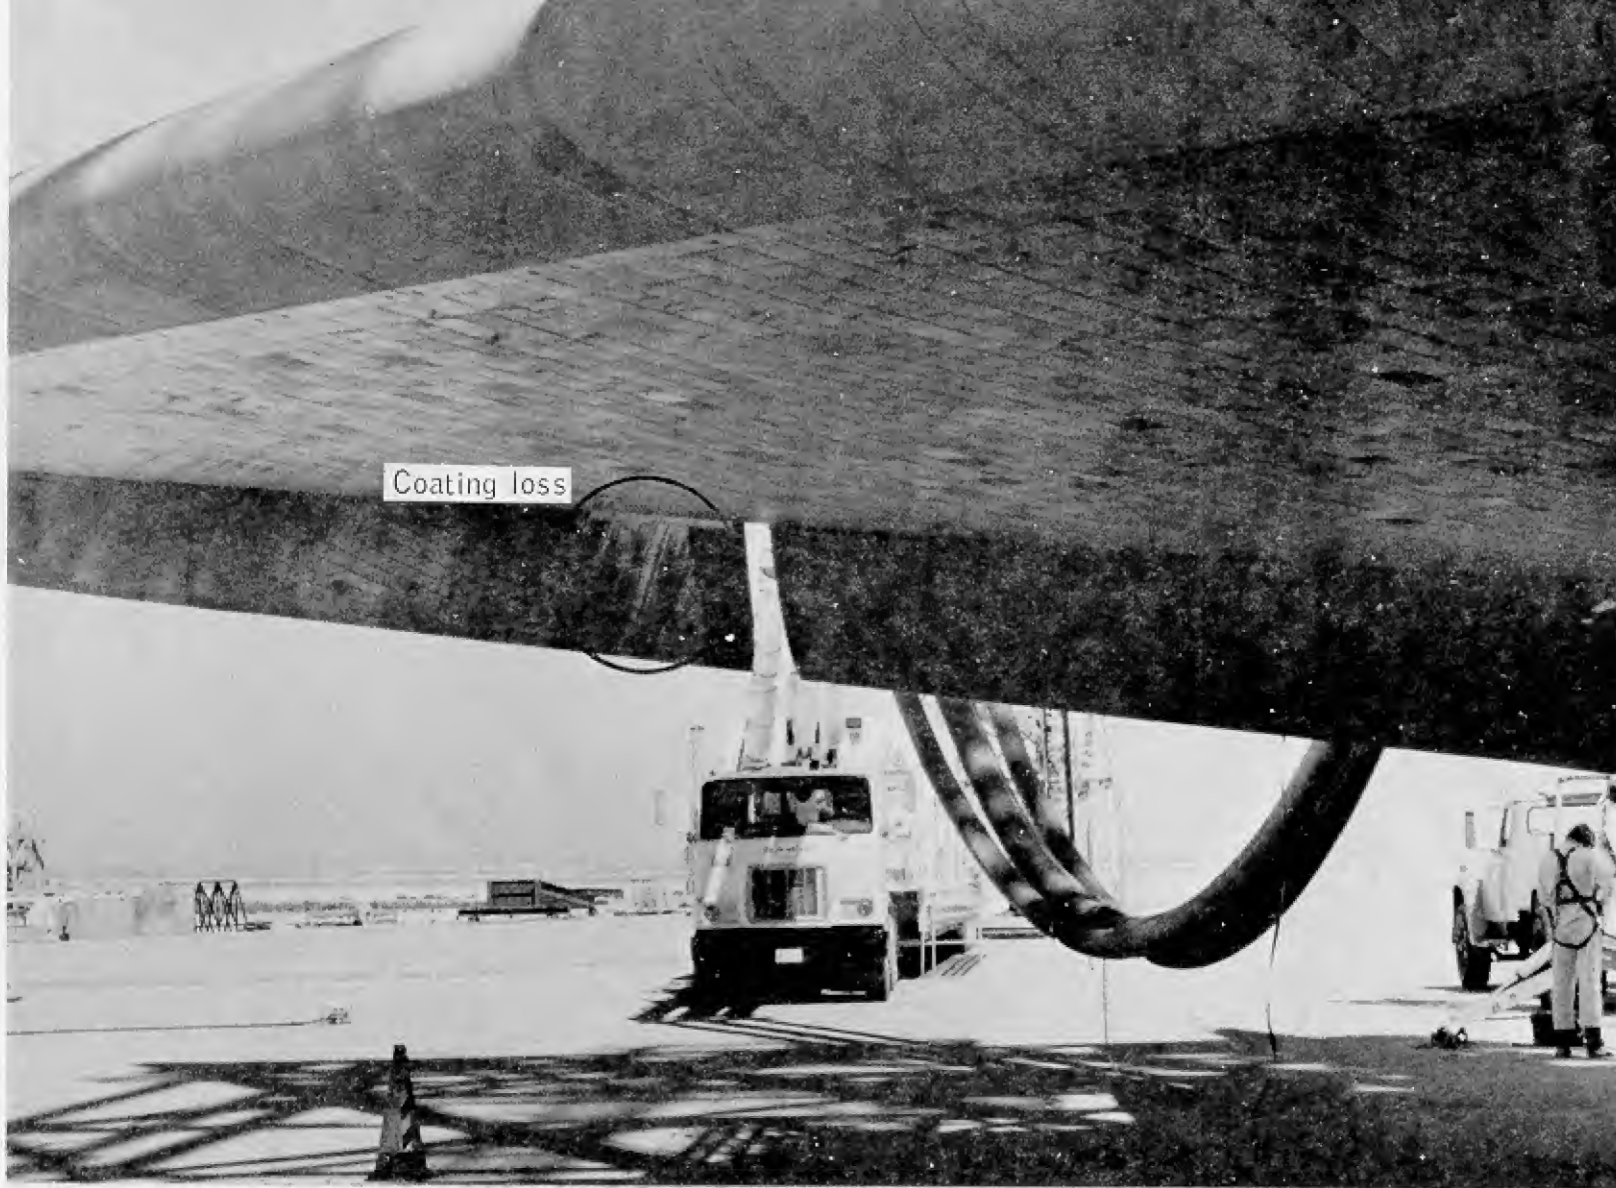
Coating loss on lower surface of right inboard elevon.
